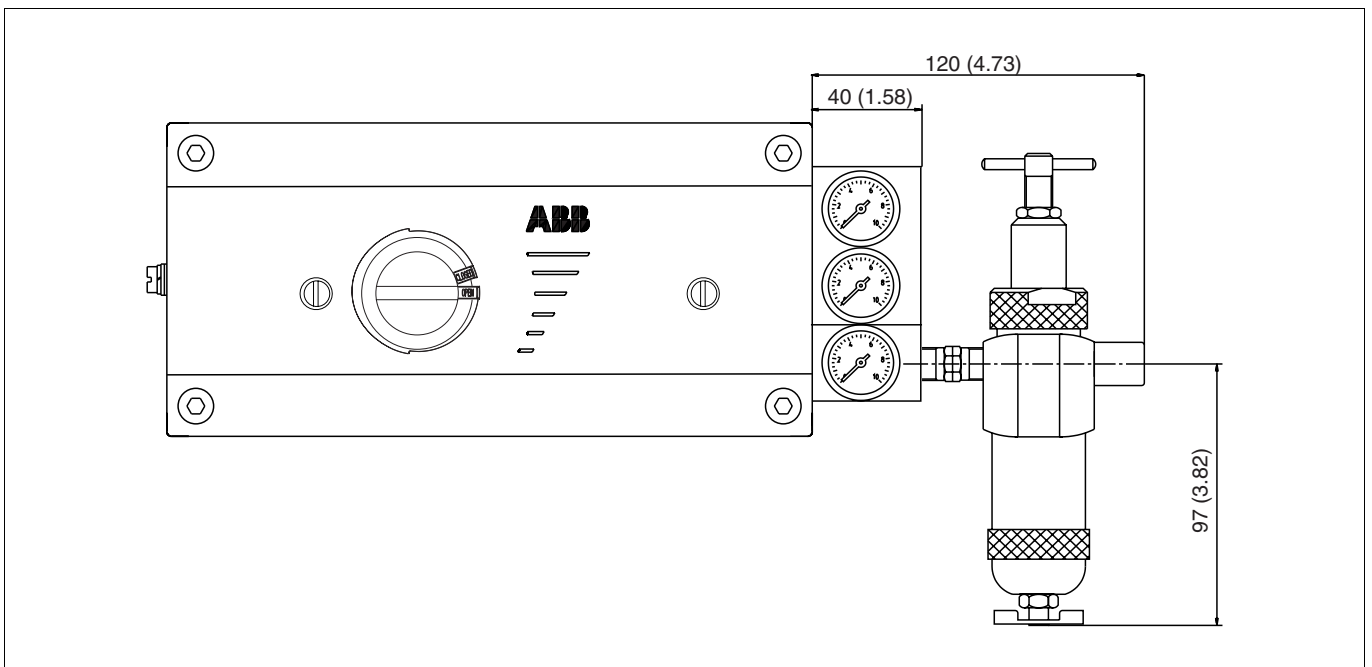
Positioner TZIDC-210 with pressure gauge block and filter regulator
